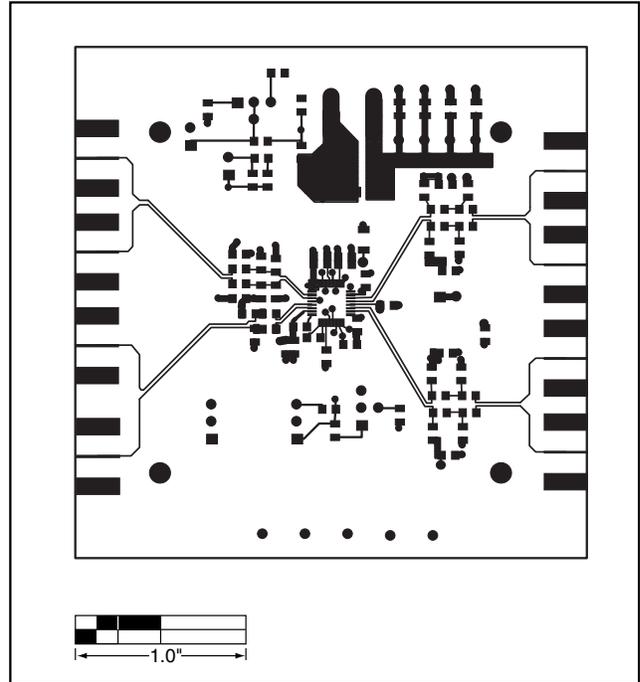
MAX3675/MAX3676 EV Kits PC Board Layout—Component Side
